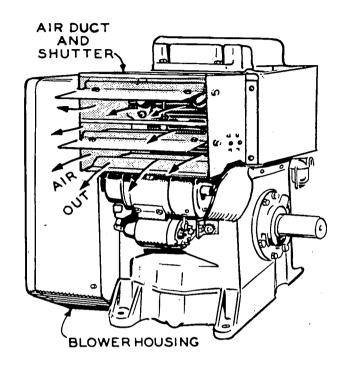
OPTIONAL SHUTTER ASSEMBLY
